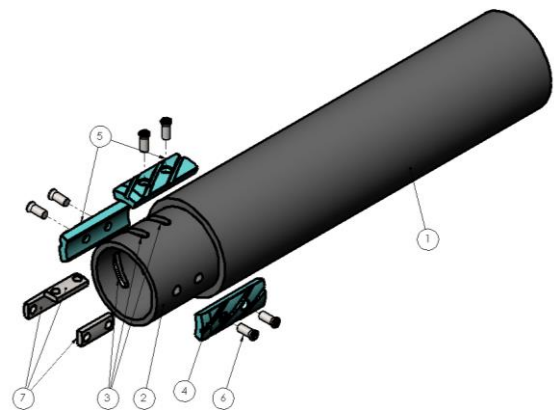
General appearance of a combined tool for expanding holes with cutting-smoothing guiding inserts with 30° cutting edge inclination
